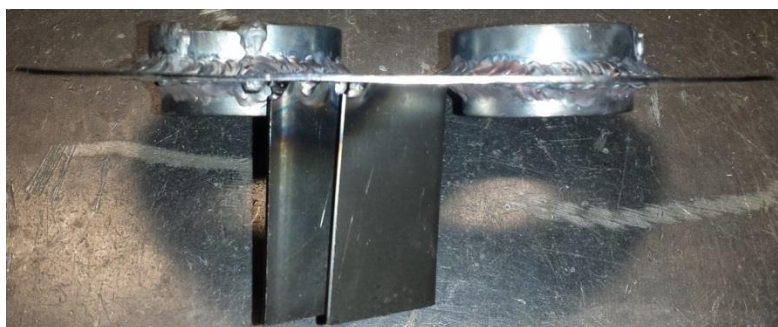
Mild steel inner bulkhead with inlet and outlet tubes, retaining rings, and reflector plates. The outer bulkhead was then tack-welded to the other end of the reflector plates.
